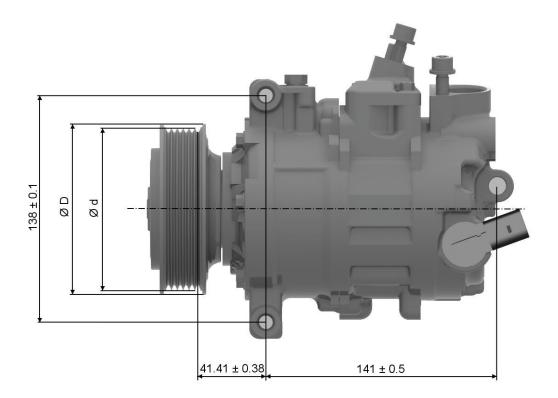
Dimensions of refrigerant compressor, side view (example DENSO-7SEU17)
